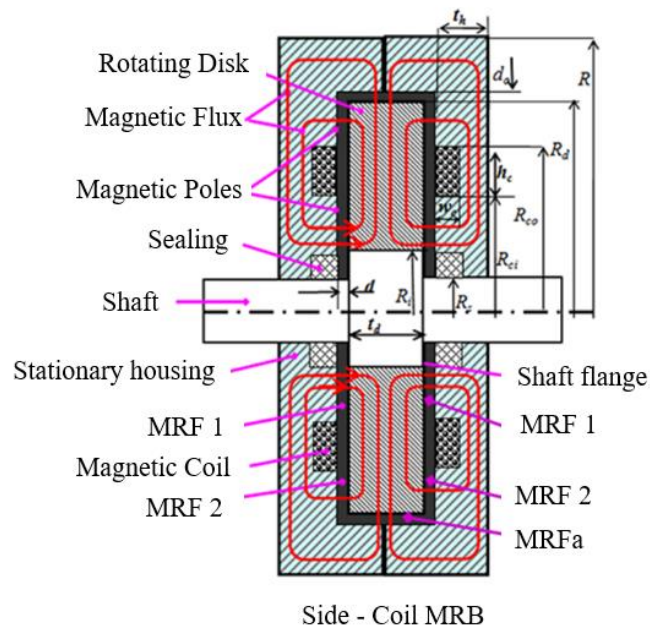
Cross view of hybrid Side-coil MR Brake
